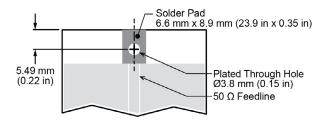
ANT-2.4-PW-LPN Antenna Recommended Mounting and PCB Footprint
